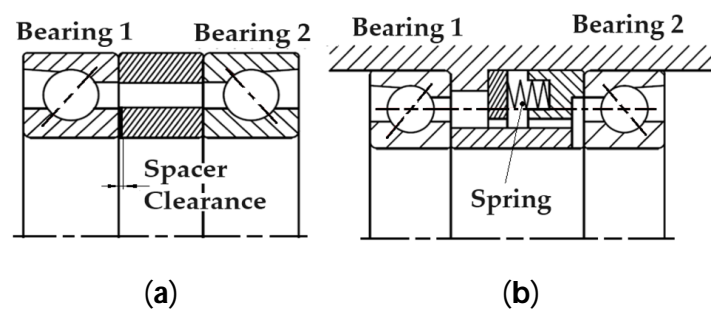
Schematic of a preloading method of bearings and adjustment method: (a) position preloading with spacer; (b) constant pressure preload with spring.
